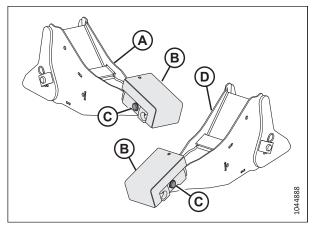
Draper Header Supports – RHS (A) and LHS (D) supports shown
